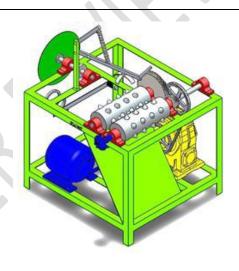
Coconut De-Husking, Cutting and Grating Machine
